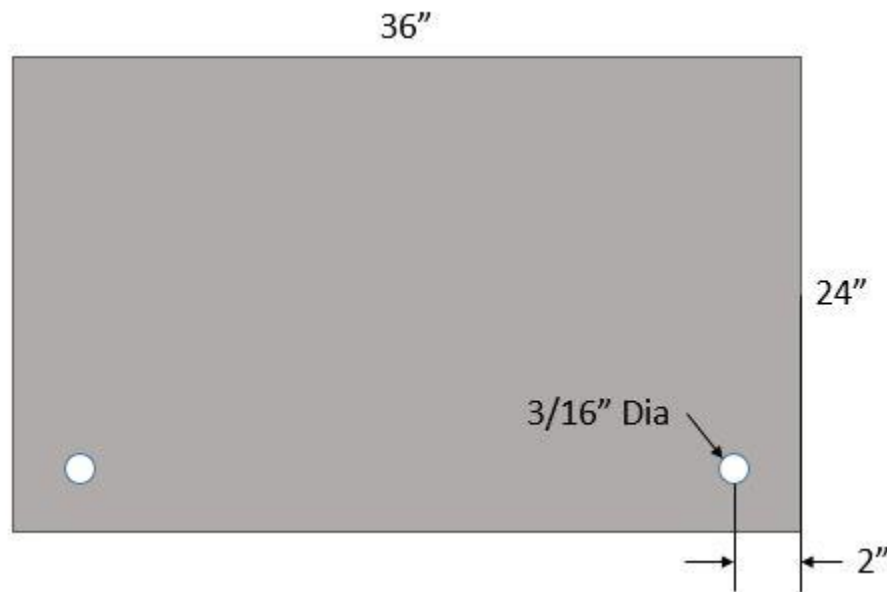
Schematic for aluminum mold used for manufacture of coupons.
